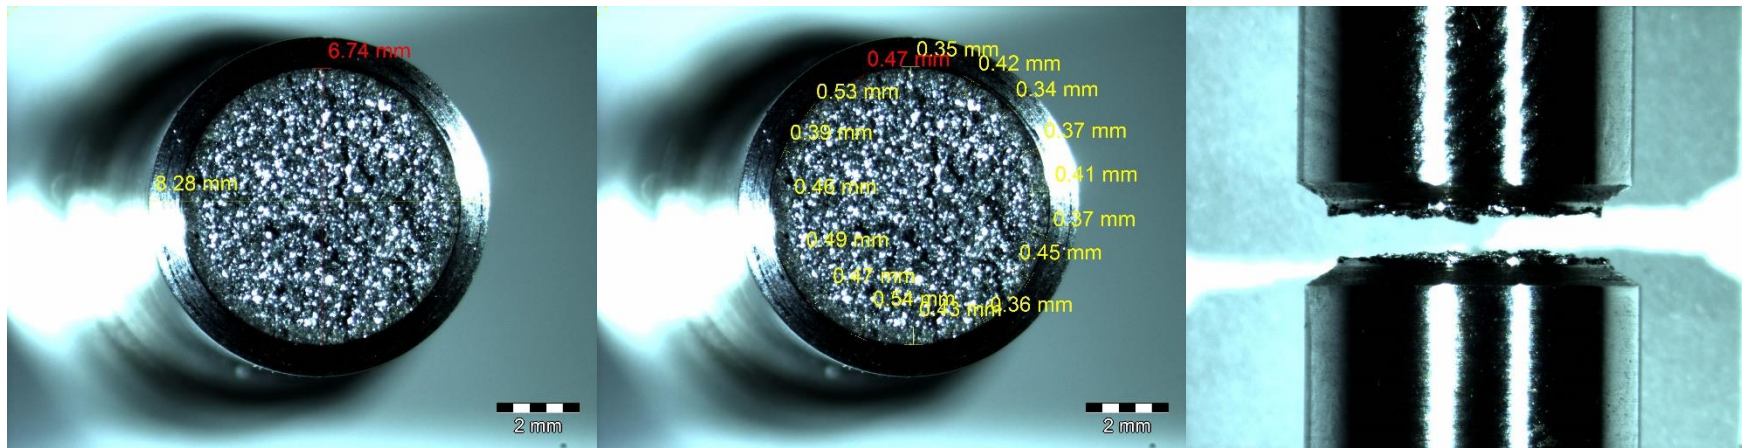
Cross-sectional and side view of fractured ECCRB-03
